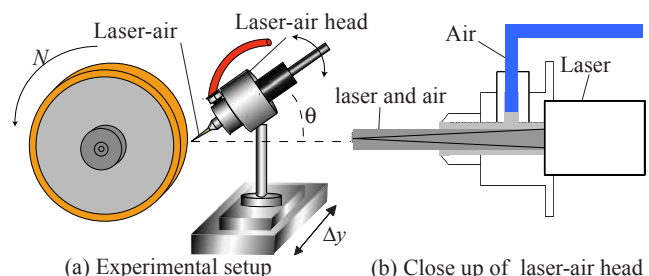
Procedure of laser dressing of metal-bonded grinding wheel
